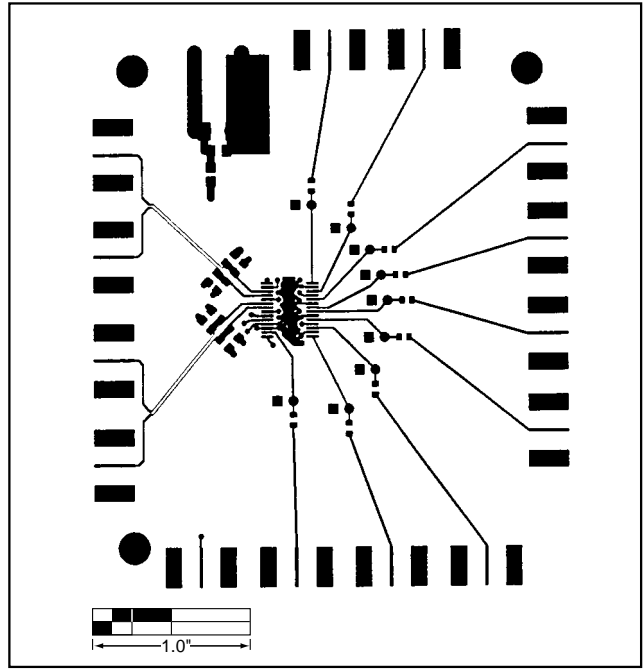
MAX3680 EV Kit PC Board Layout—Component Side
